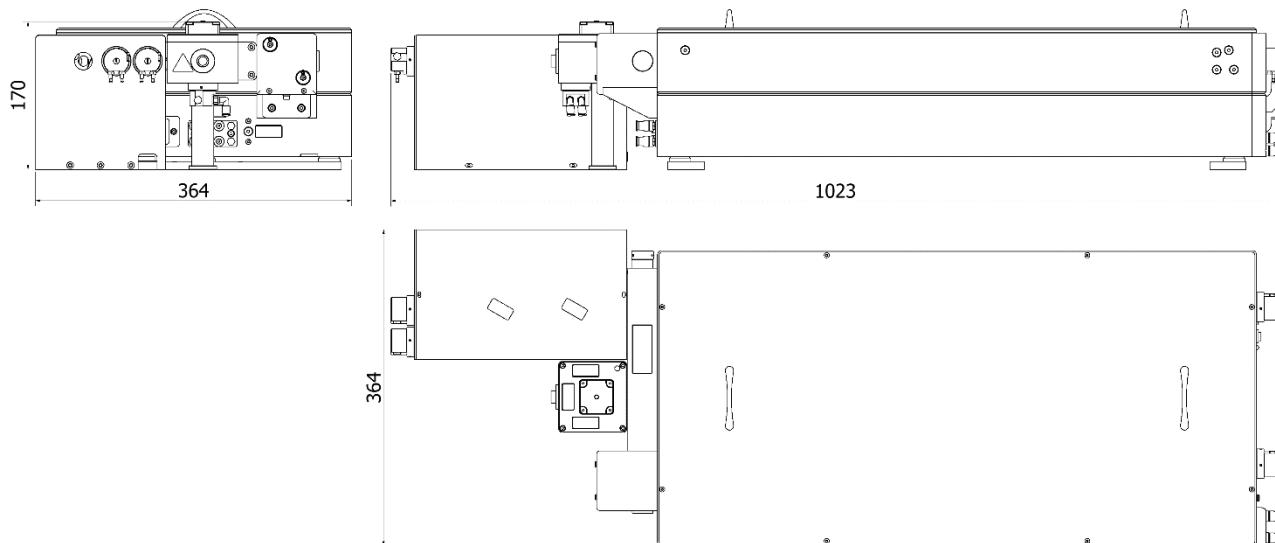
Physical dimensions (mm) of ORPHEUS-HP housing with separator wheel box
